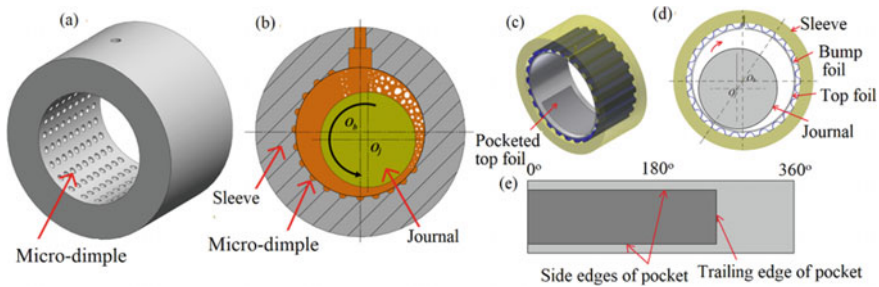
Textured journal bearing; a Isometric view; b front view with journal and cavitation region c CAD model of a pocketed air foil bearing, d schematic view of air foil bearing with different components, e unwrapped view of pocketed top foil
